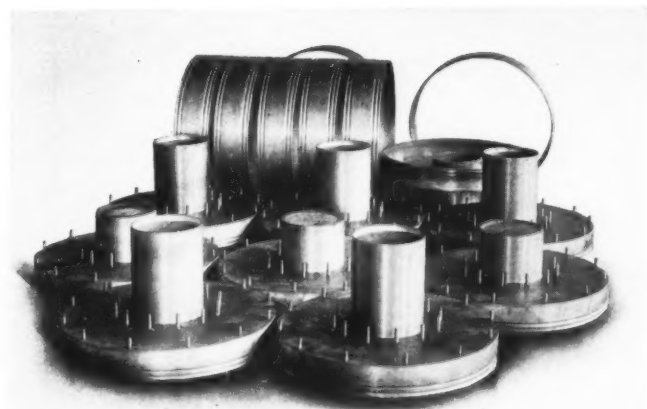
Top—Light, neat appearing parts such as these can be obtained by built-up welded construction. Fig. 2—Bottom—Ink tank requires the use of a special alloy of corrosion resisting properties
